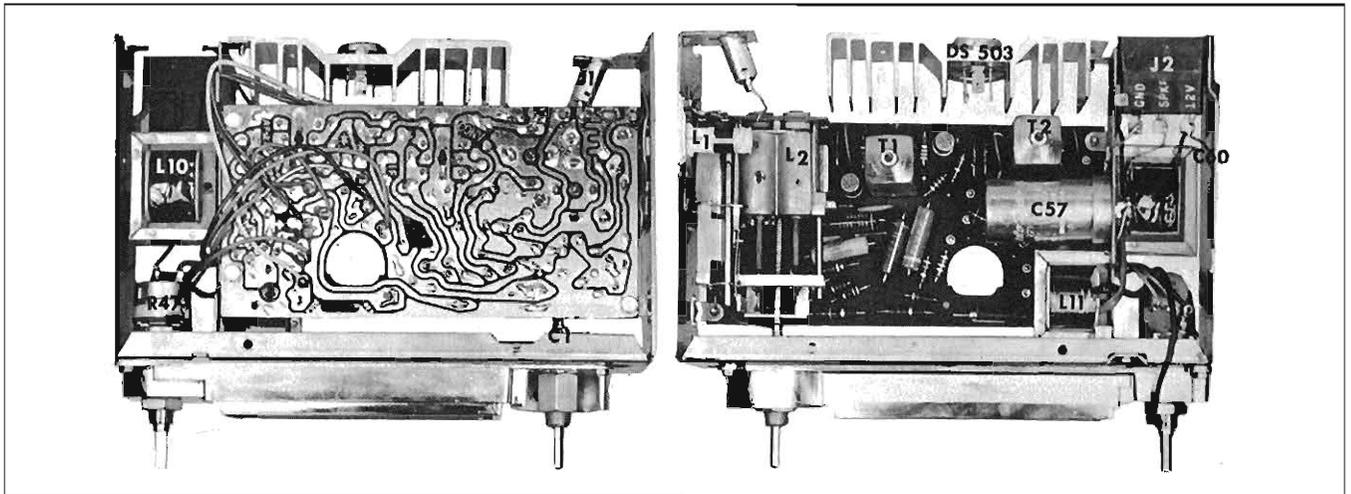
CHEVELLE PARTS LAYOUT TUNER VIEW - 986201 - RADIO
